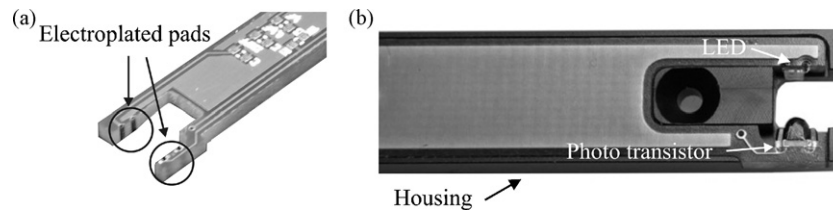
(a) Electroplated through connections after the PCB-production process. (b) Optical sensor inside the developed housing.
